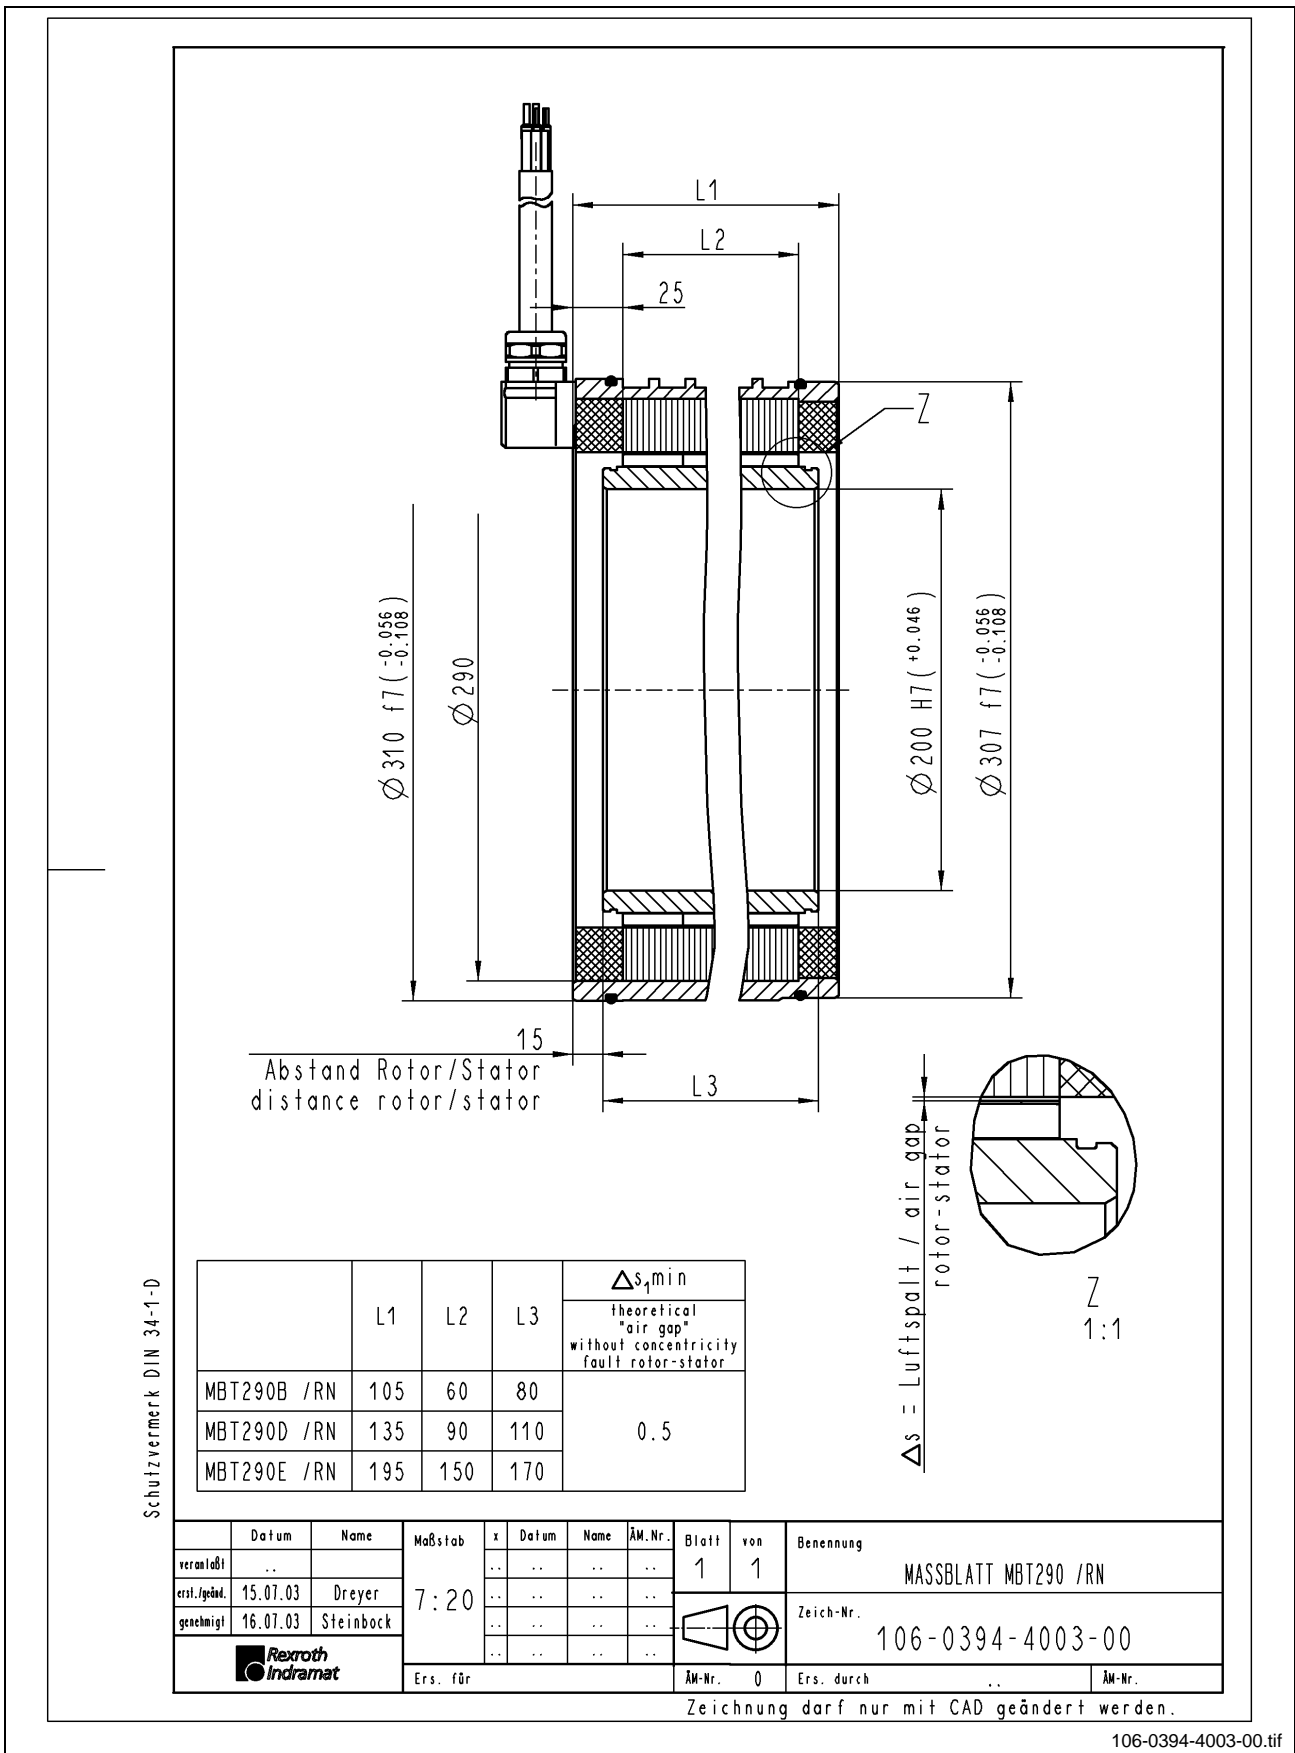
Dimension sheet size 290, electrical connection "RN"
